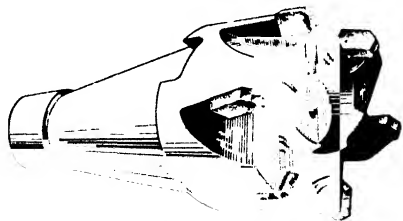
The Nelco Shank-Type End Mill with Brazed-on Carbide Tips
